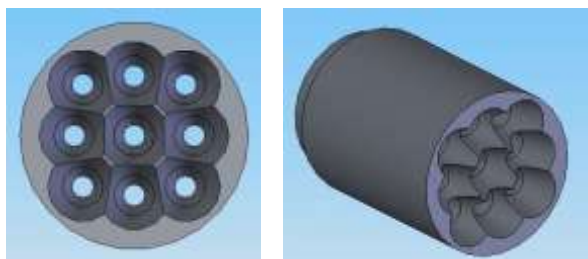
Nozzle D6/9 (9x ø 6 mm holes) [15, 16]
